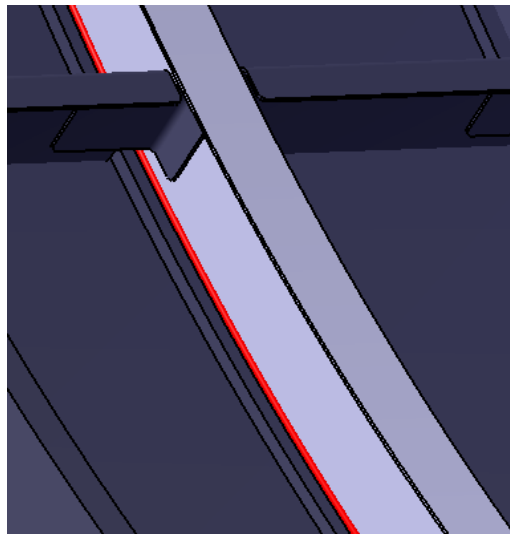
Schematic of a typical T-profile frame welded against a skin with FSW. The anticipated weld position is shown in red
